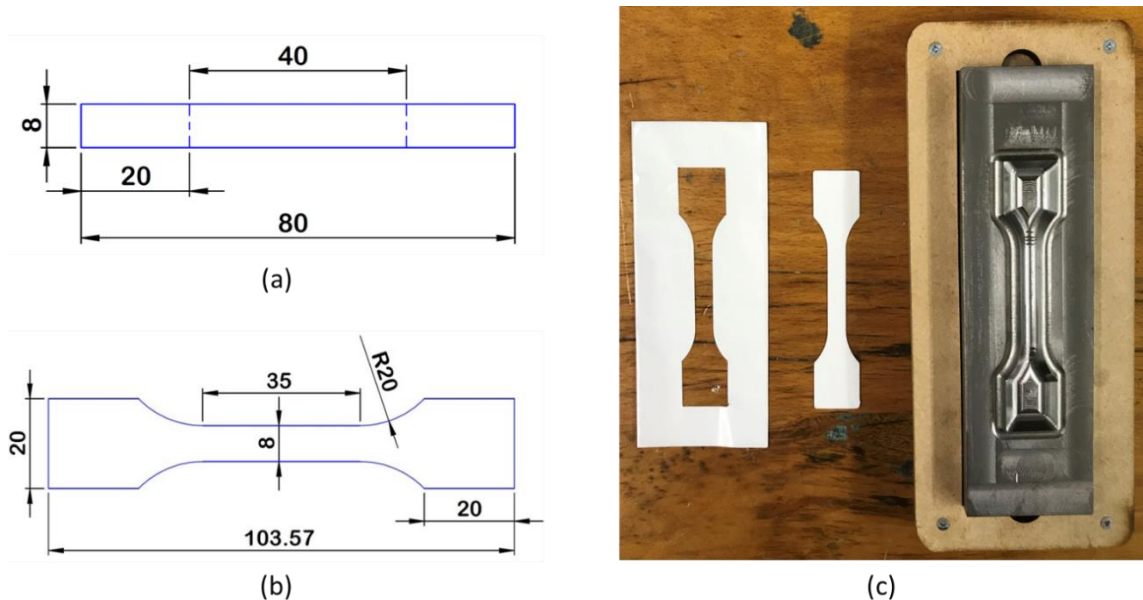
The schematic of (a) strip-shaped sample and (b) dogbone-shaped sample; (c) The dogbone cutting tool and a representative dogbone-shaped sample cut with this tool.
